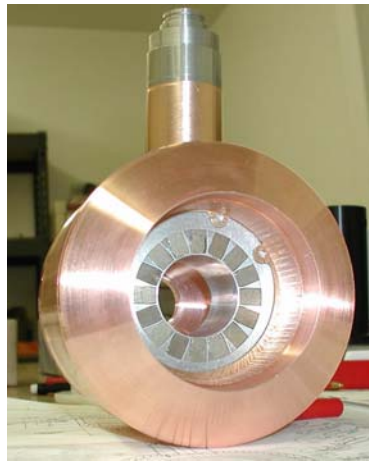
Test fit of a PMQ assembly into a production drift tube.
